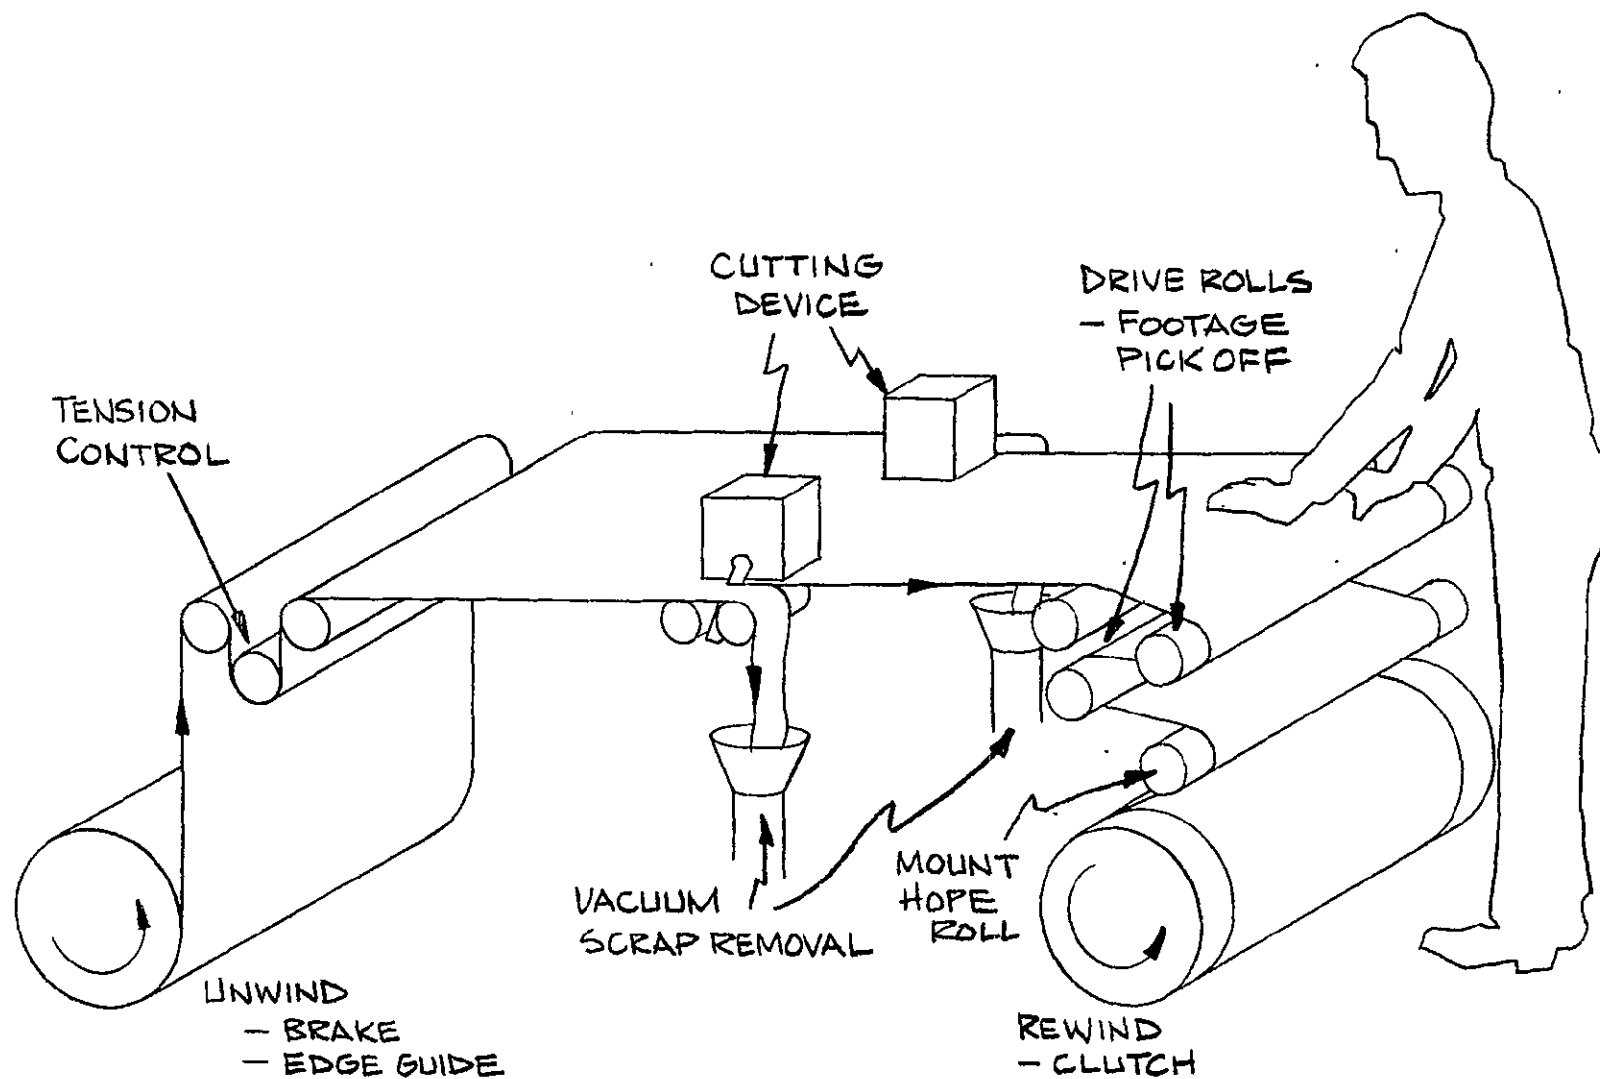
shows the concept for a machine which would be used for tailoring the gores when required. Material processed by this machine would have been inspected and have had rip stop added by the machine shown in Figure II-20 and described in Section 2.3.3.
